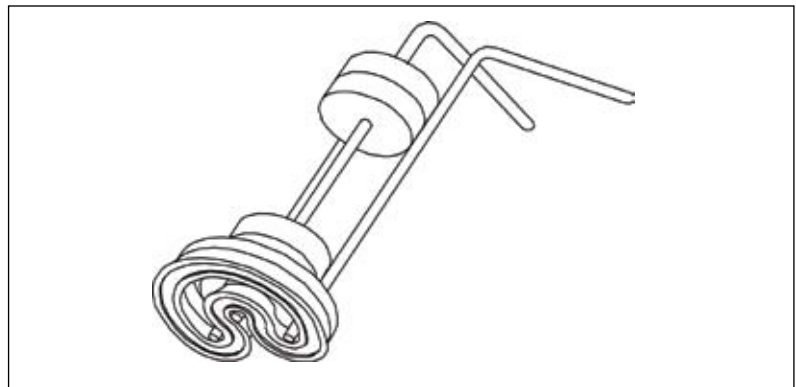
Three-leg installation tool for polyurethane and rubber seals
